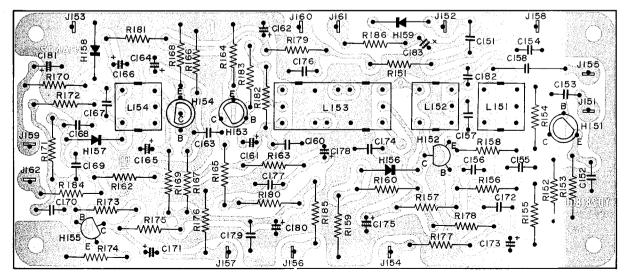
AM Tuner Unit Assembly P150 Component Locations
